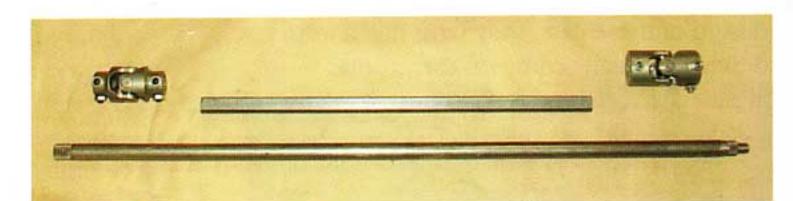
Kit P/N 53-158 includes a new steering shaft for the steering column, an upper and lower U-joint and a shaft that connects the two U-joints together. This new system is all held together with set screws and lock nuts so no need for welding!
